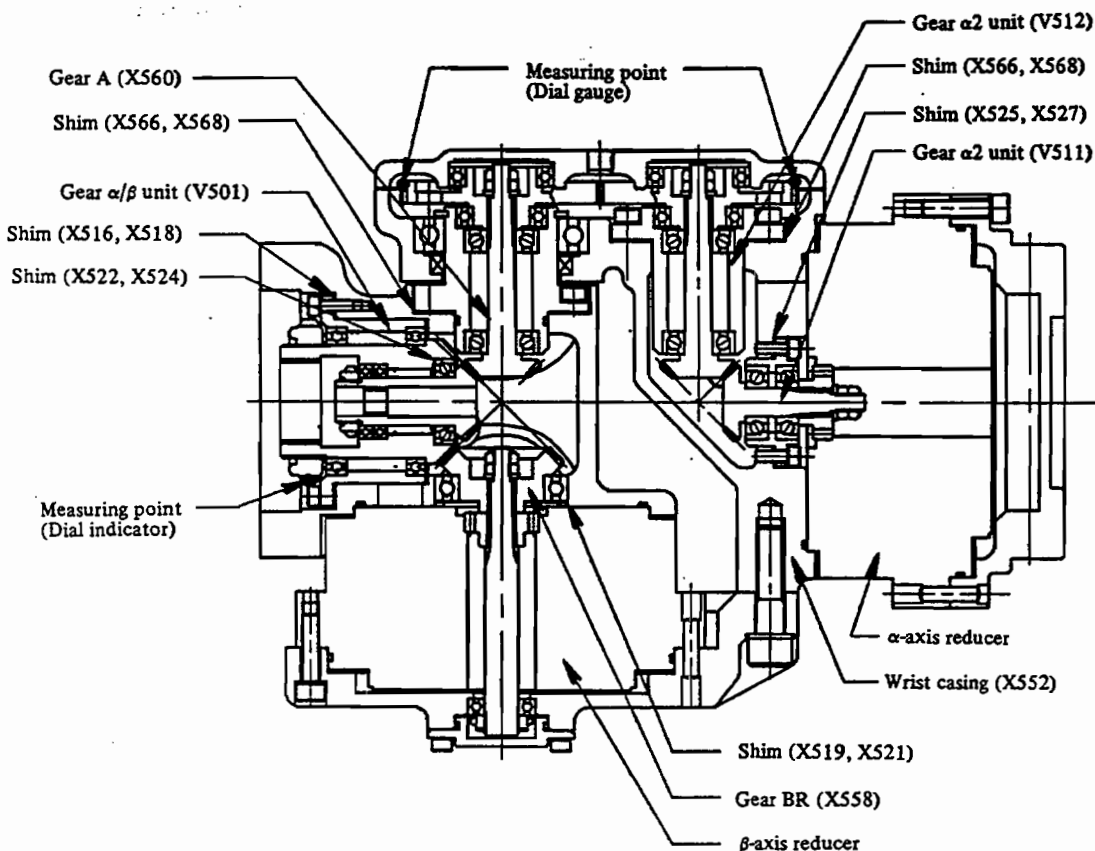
(d) Adjusting α/β -axis bevel gear backlash (in-line wrist)
